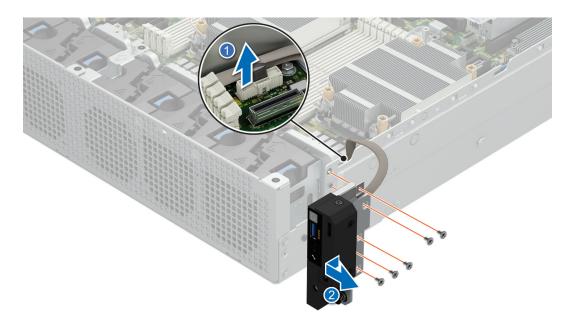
Removing the Power button control panel for Rear Accessed configuration
